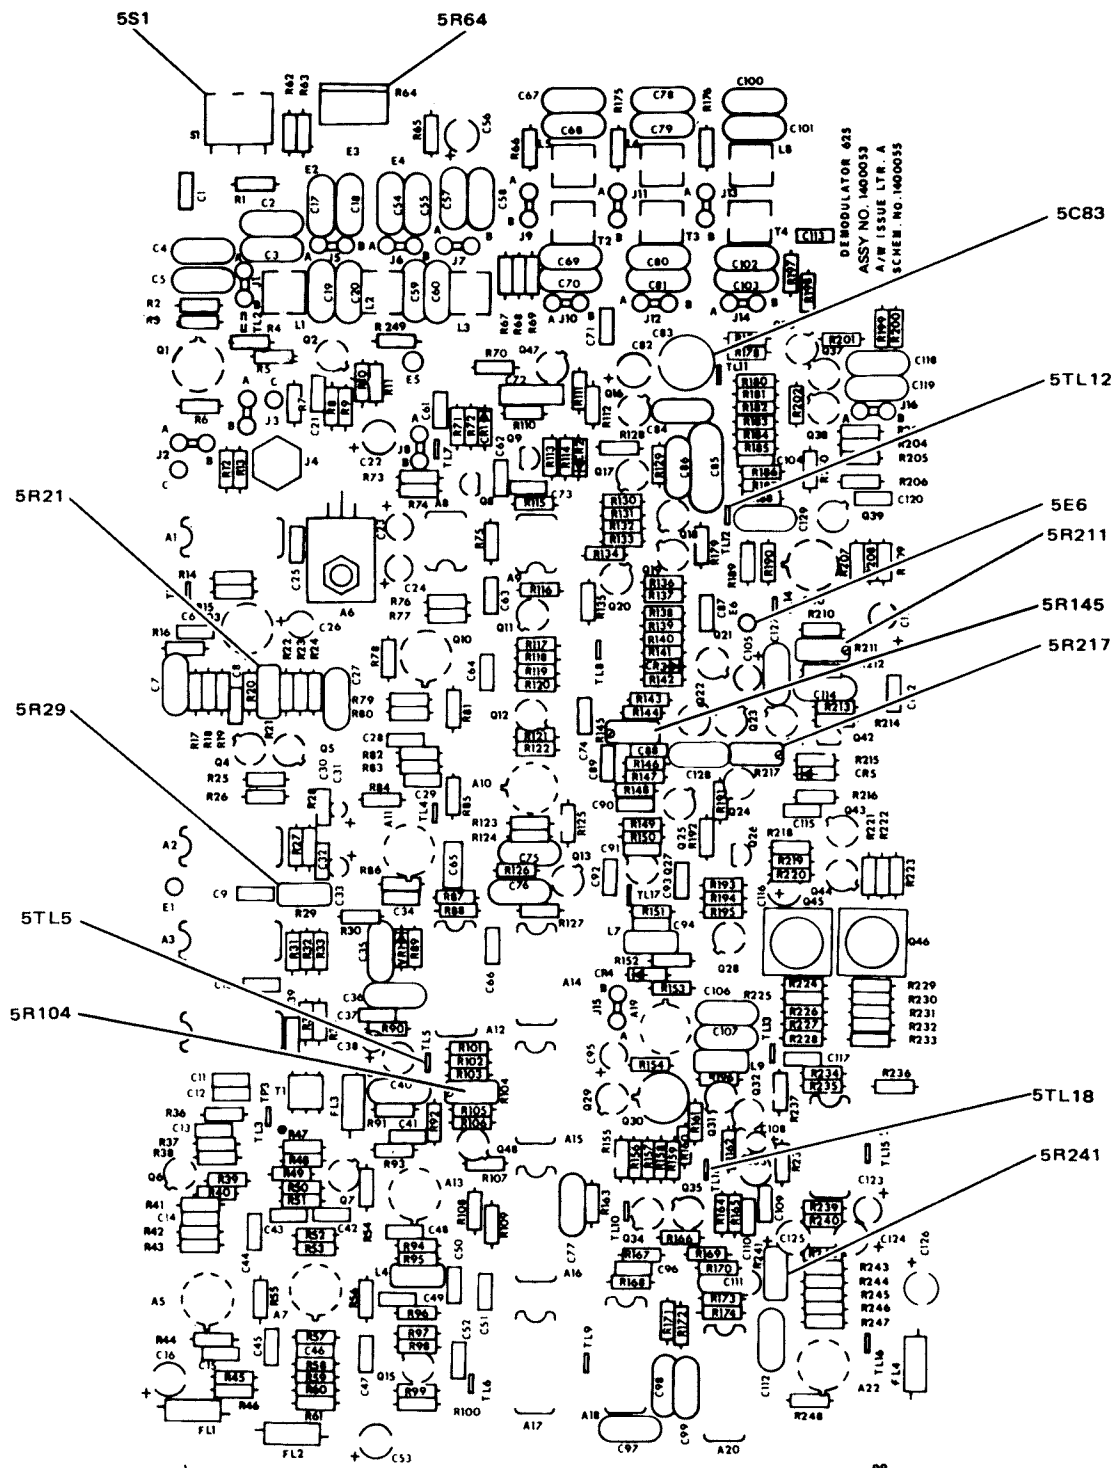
Demodulator PWA 5 (625), Assembly No. 1400053
